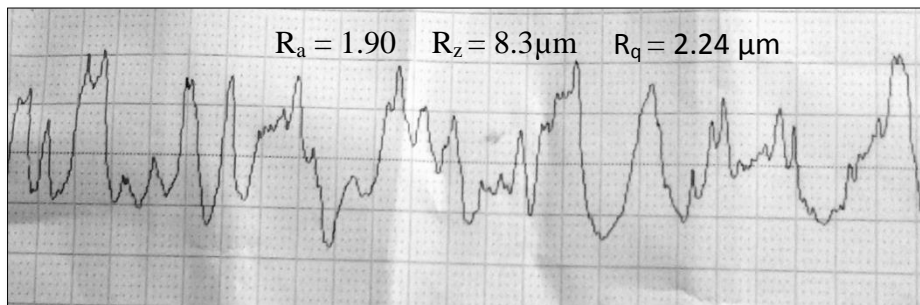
Initial surface roughness profile for mild steel workpiece
